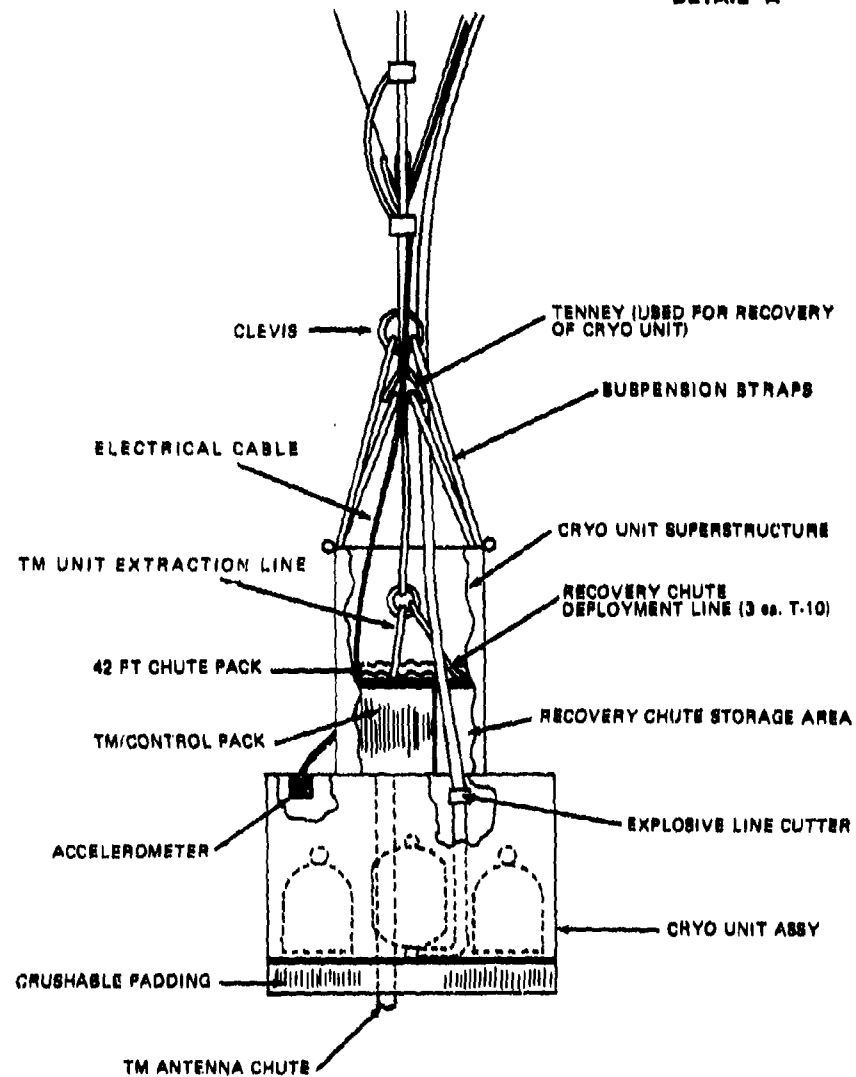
Outline Drawing ALBS Prototype Configuration - Detail A
